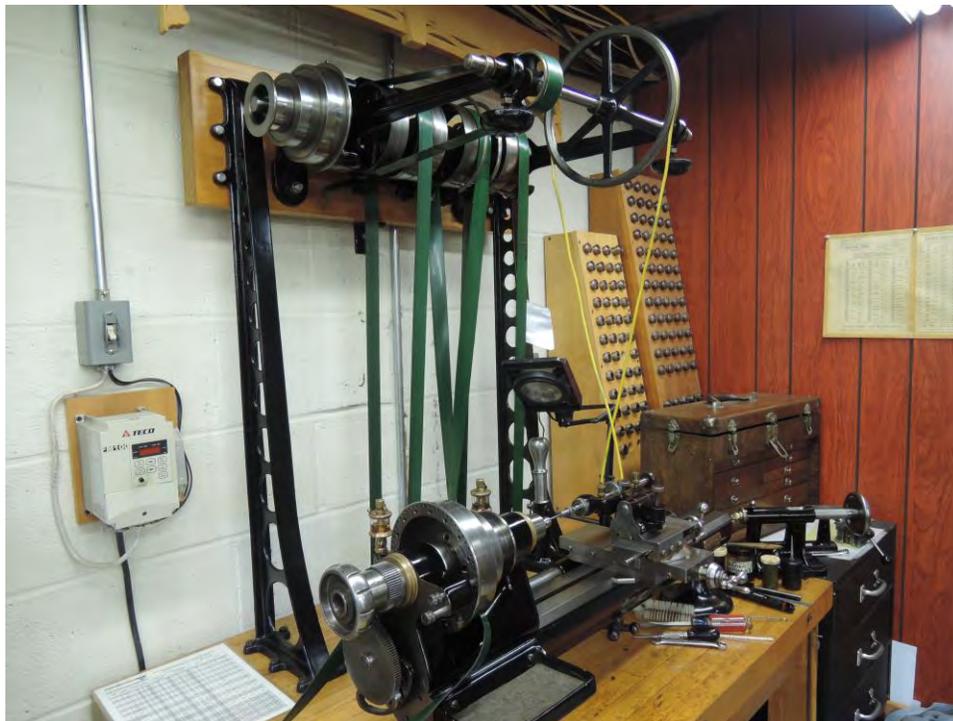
The Hardinge Cataract lathe with internal grinding attachment.
